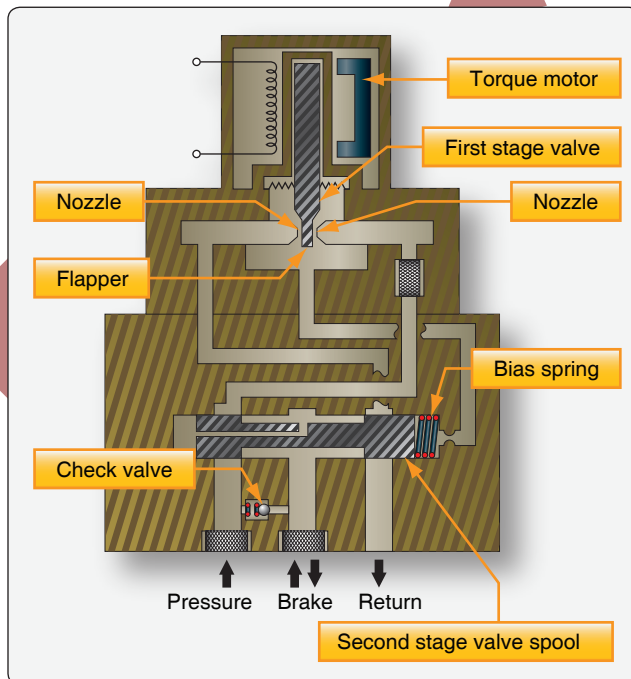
An antiskid control valve uses a torque motor controlled flapper in the first stage of the valve to adjust pressure on a spool in the second stage of the valve to build or relieve pressure to the brake.
